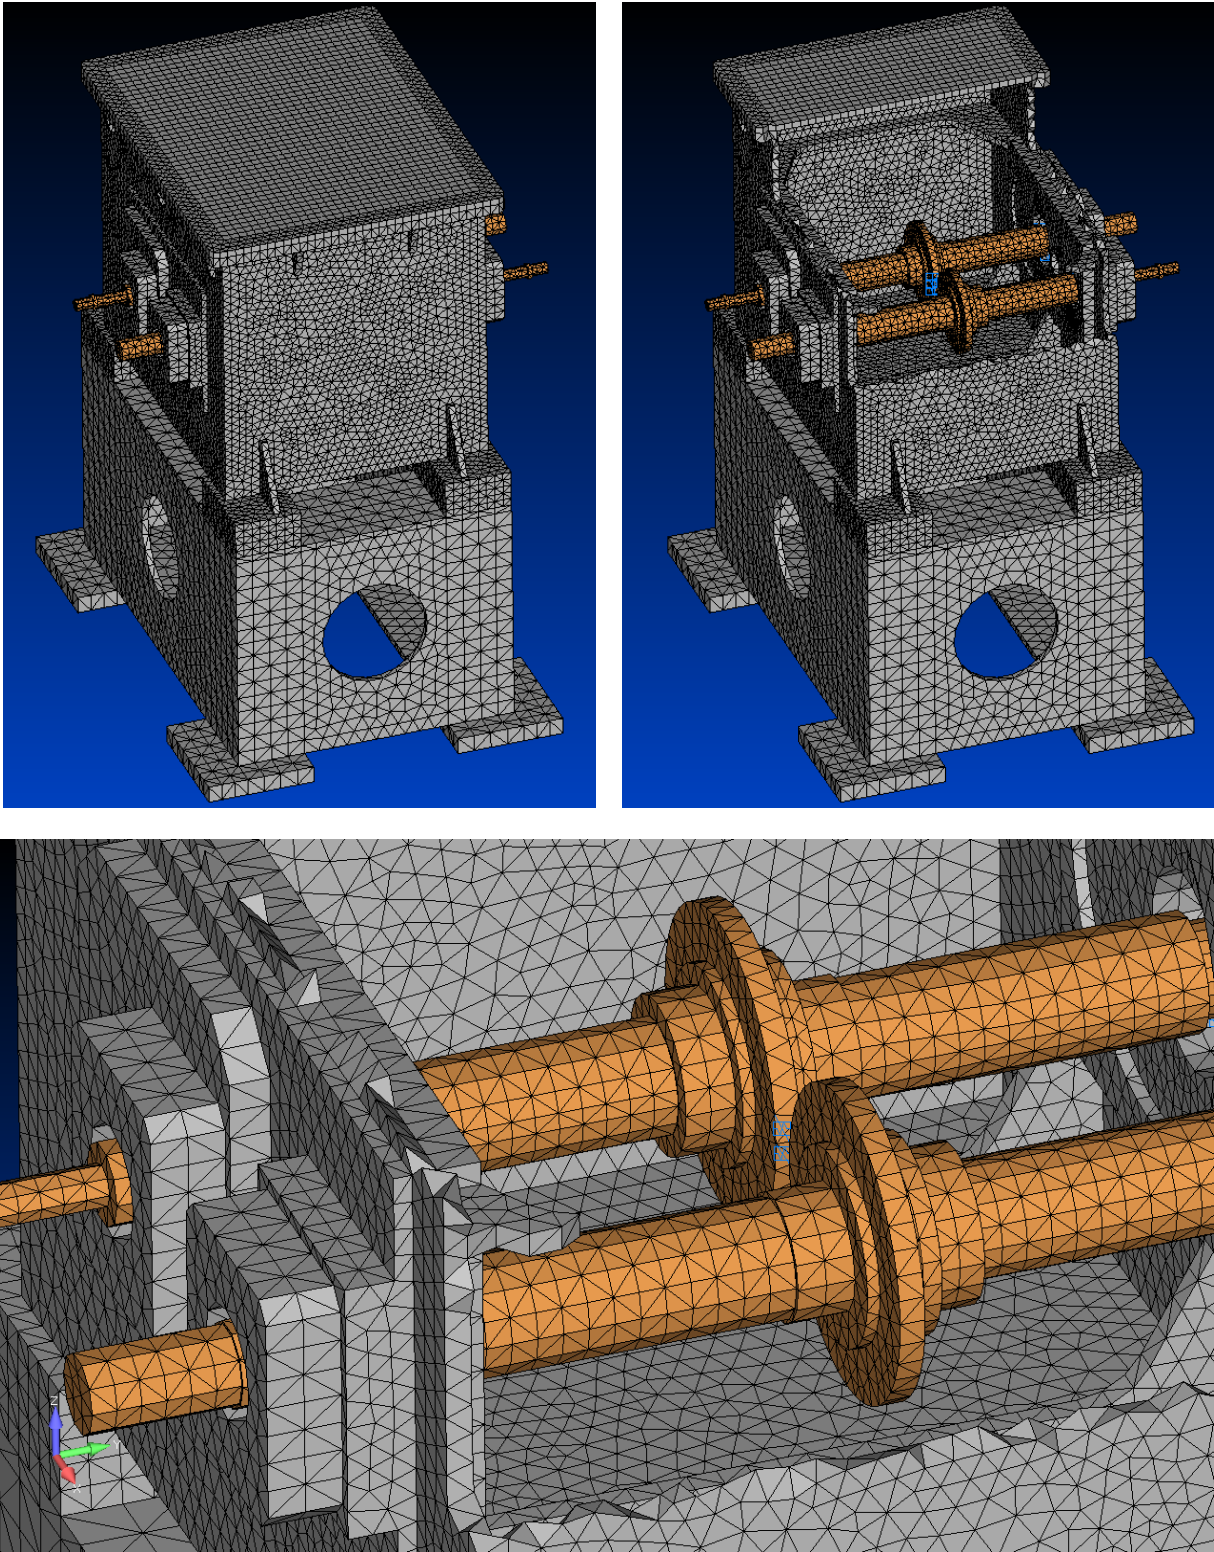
Finite element model of NASA GRC gearbox. Right - part of top cover and front and side walls removed to reveal inner shafting and gear blanks. Bottom – zoom of shafting and gear blanks.
